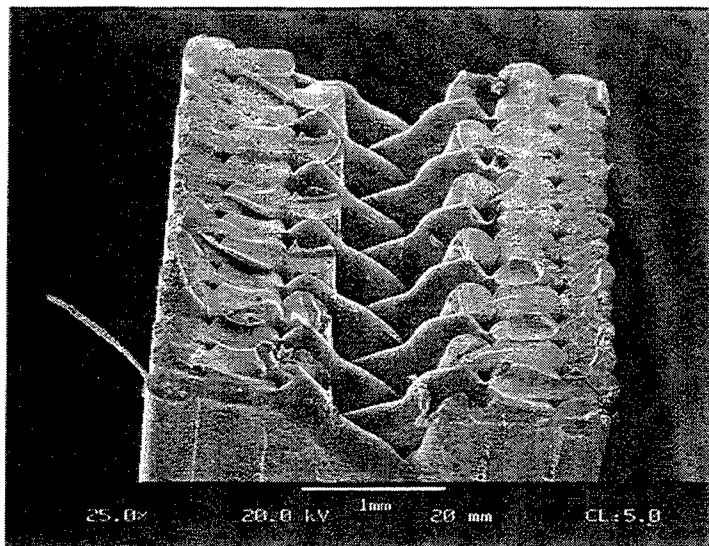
Fracture surface of Ultra impregnated sample at 0.05" gap and 25X.
